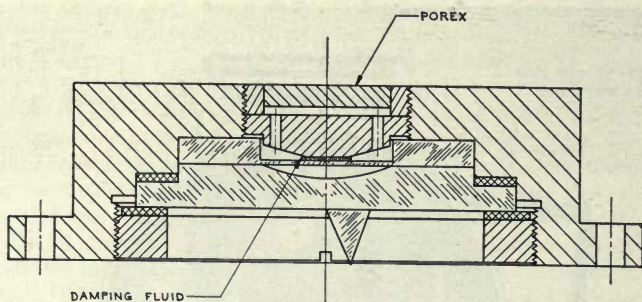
Drawing of quartz diaphragm and damping assembly.
